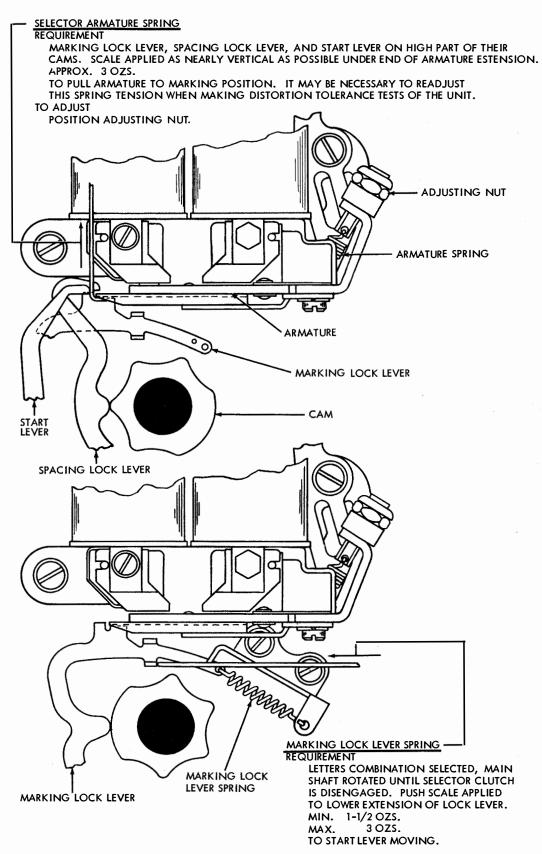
TYPING UNIT, SELECTOR MECHANISM, RIGHT SIDE VIEW
